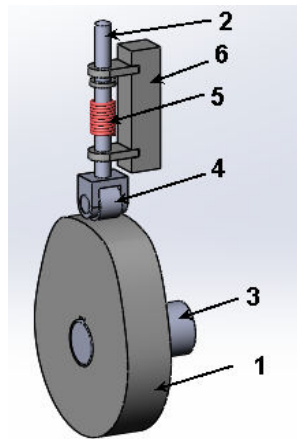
3D model of the cam mechanism (1 - cam, 2 - pusher, 3 - shaft, 4 - roller, 5 - spring, 6 - support).
